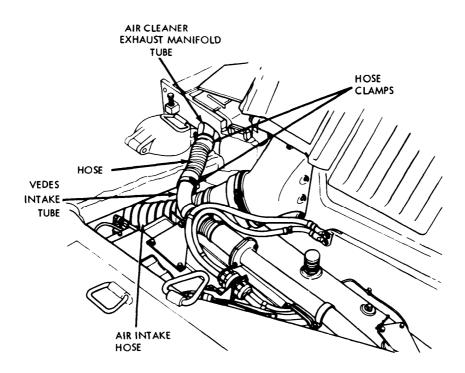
VEDES intake tube hose removal/installation (powerplant replacement).
